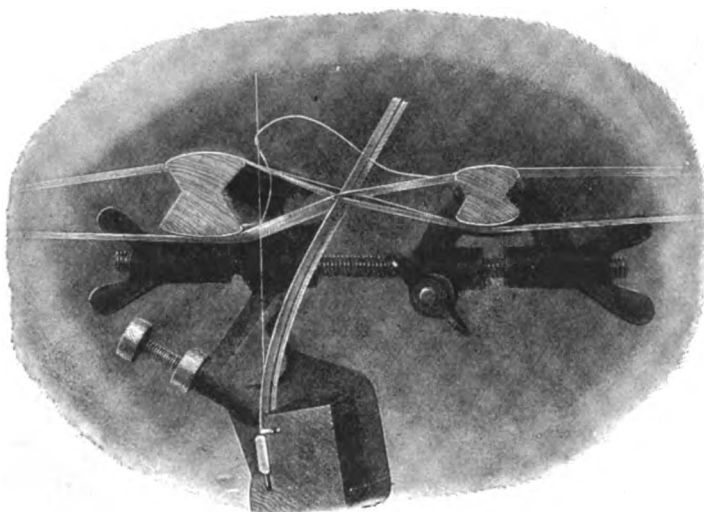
SHOWING MOVEMENT OF WIRE ON BREAKAGE OF THREAD.
